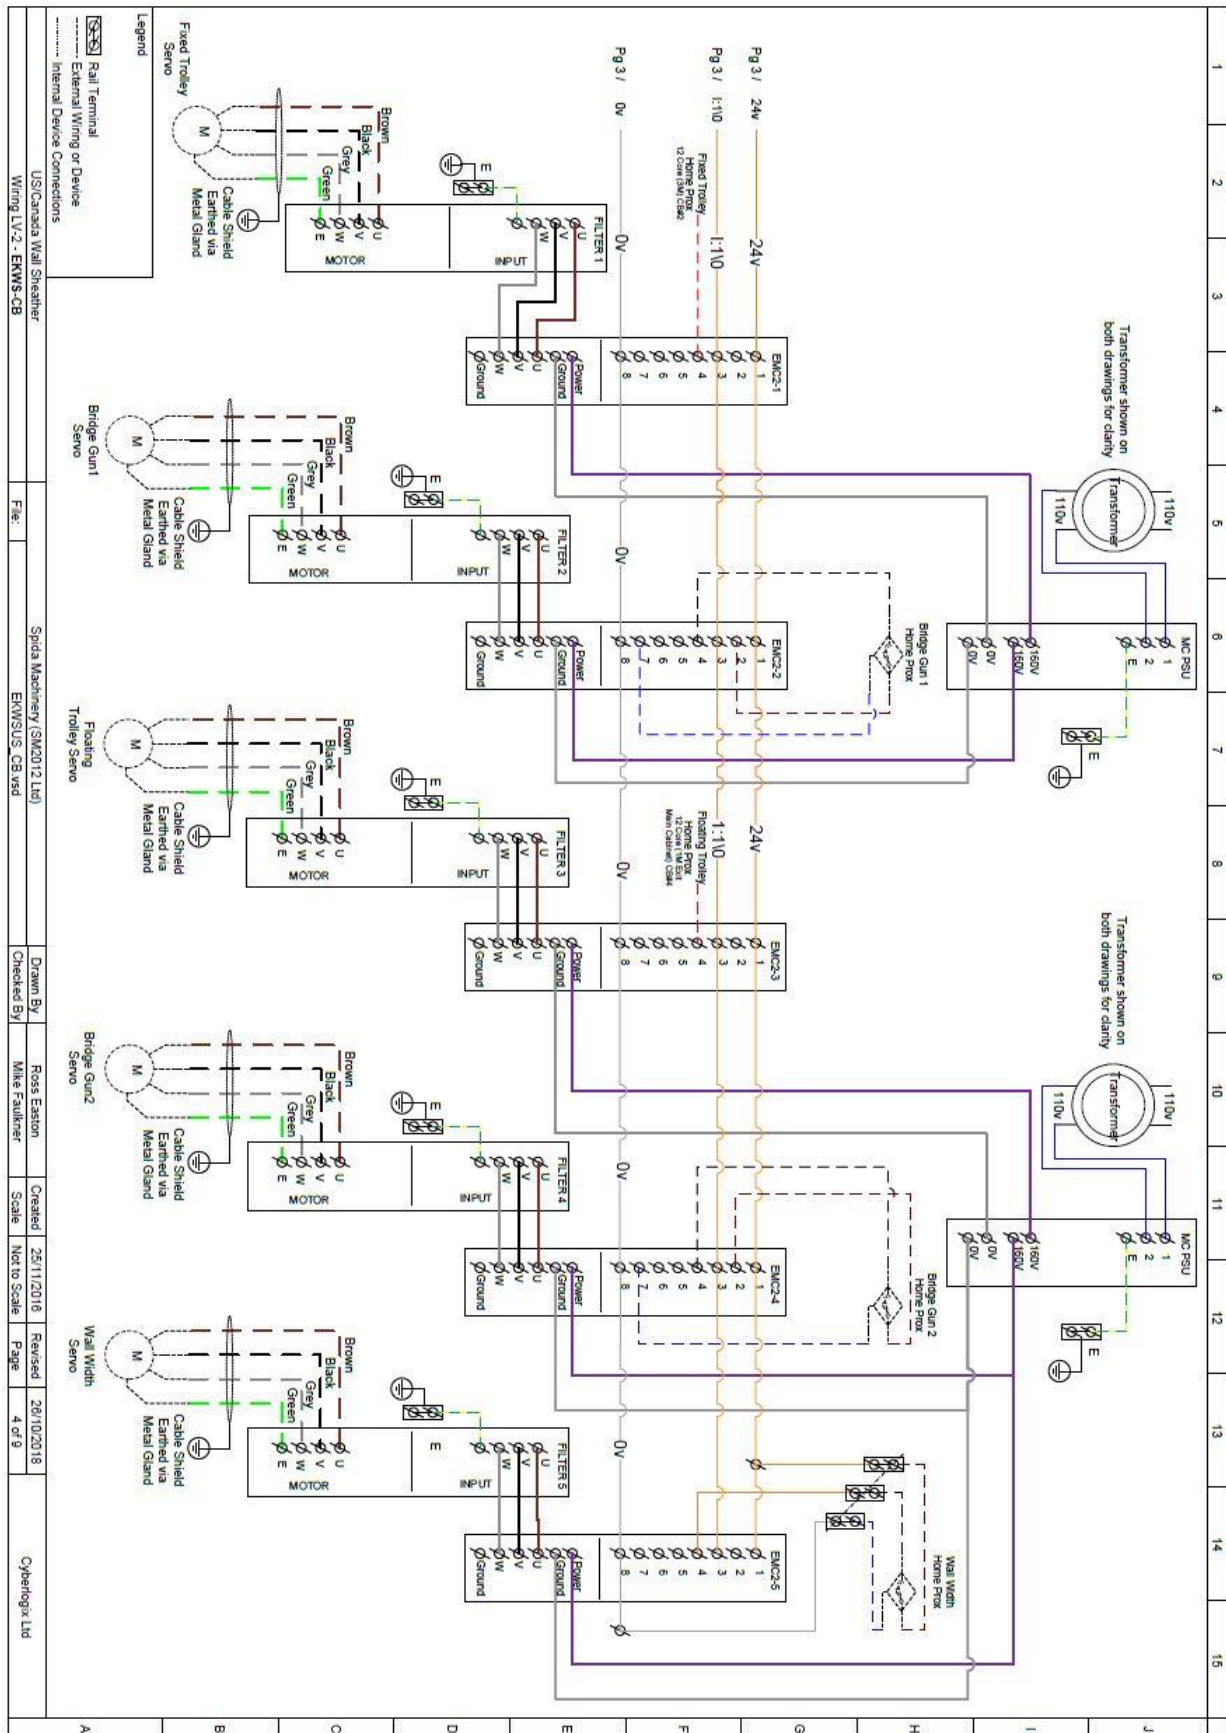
, Spida Auto Sheather Electrical Drawings US/Canada part 4
